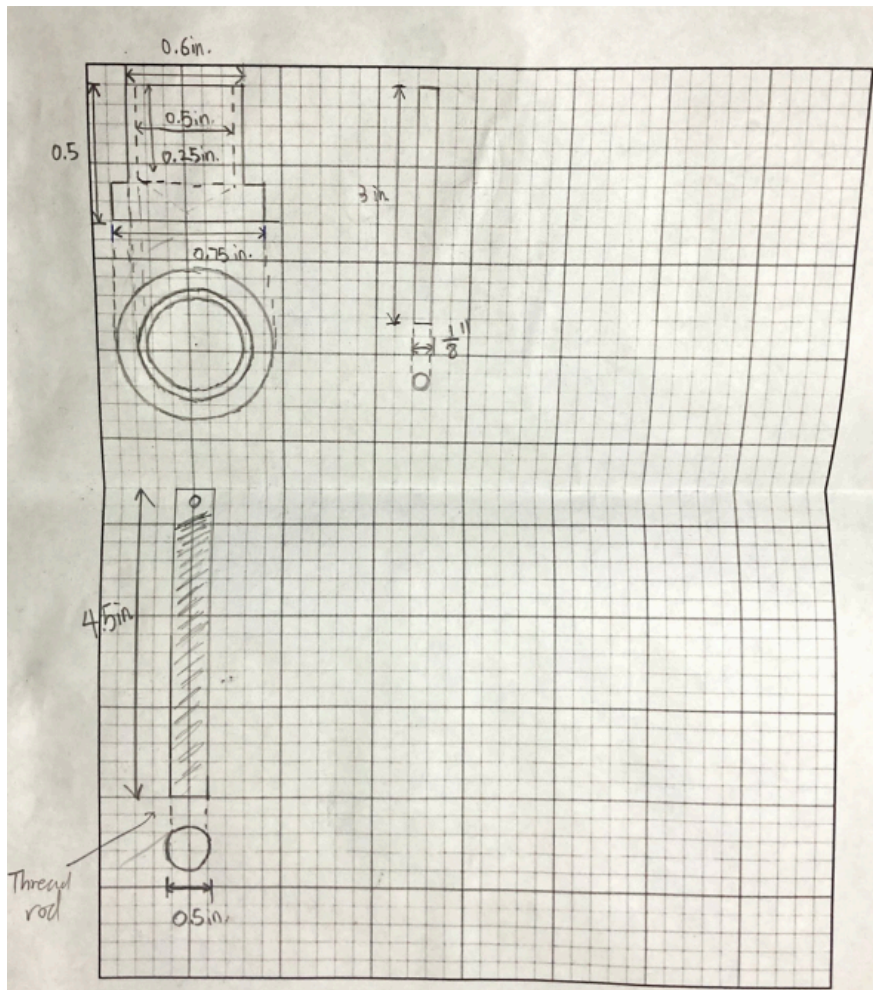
Initial Orthographic Drawing for Handle, Threaded Rod and Cap
